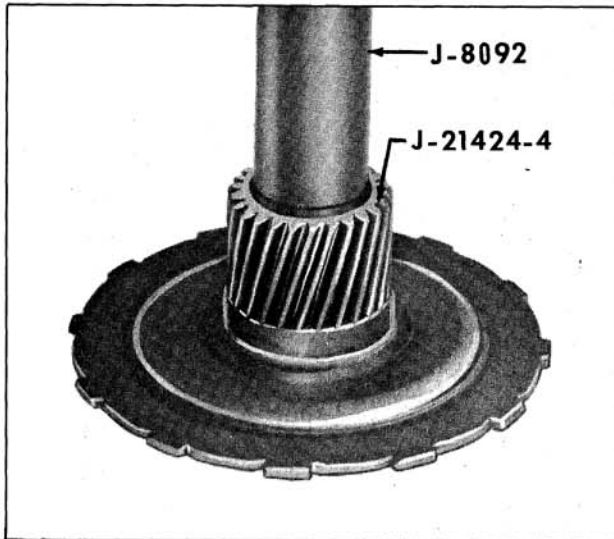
Installing Low Sun Gear and Flange Assembly Bushing
